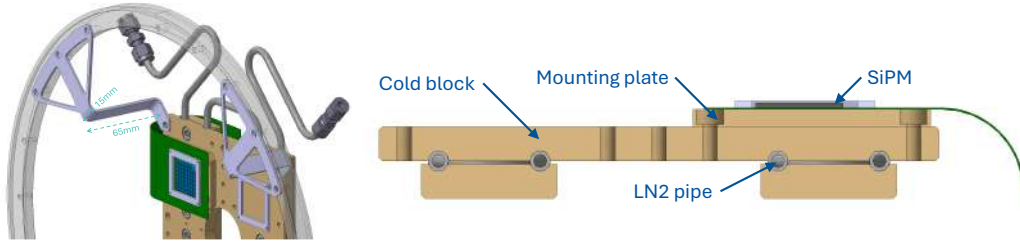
Close-up of the flex-PCB mounted on the cold volume of the cryostat demonstrator.
